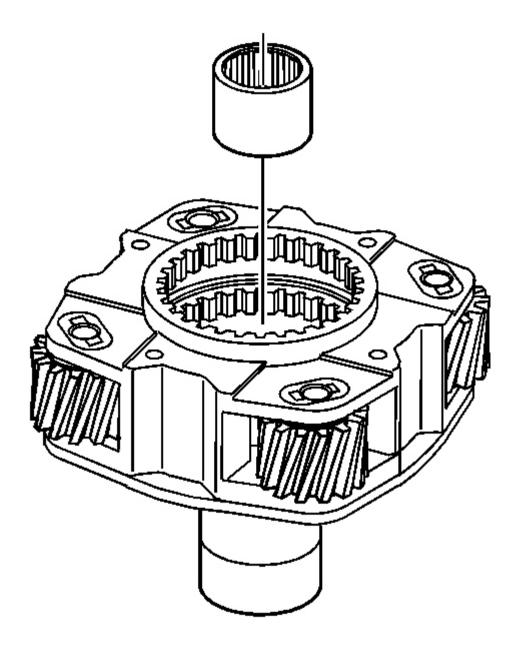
View Of Mainshaft Front Support Bearing Courtesy of GENERAL MOTORS CORP.
